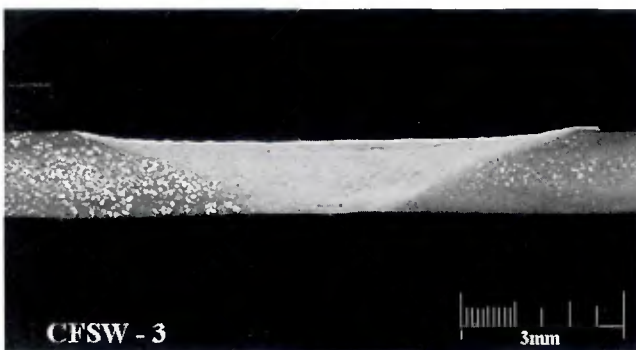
Cross section of a friction stir weld made on 1.5-mm Thixomolded AZ91 (right side is advancing side).
